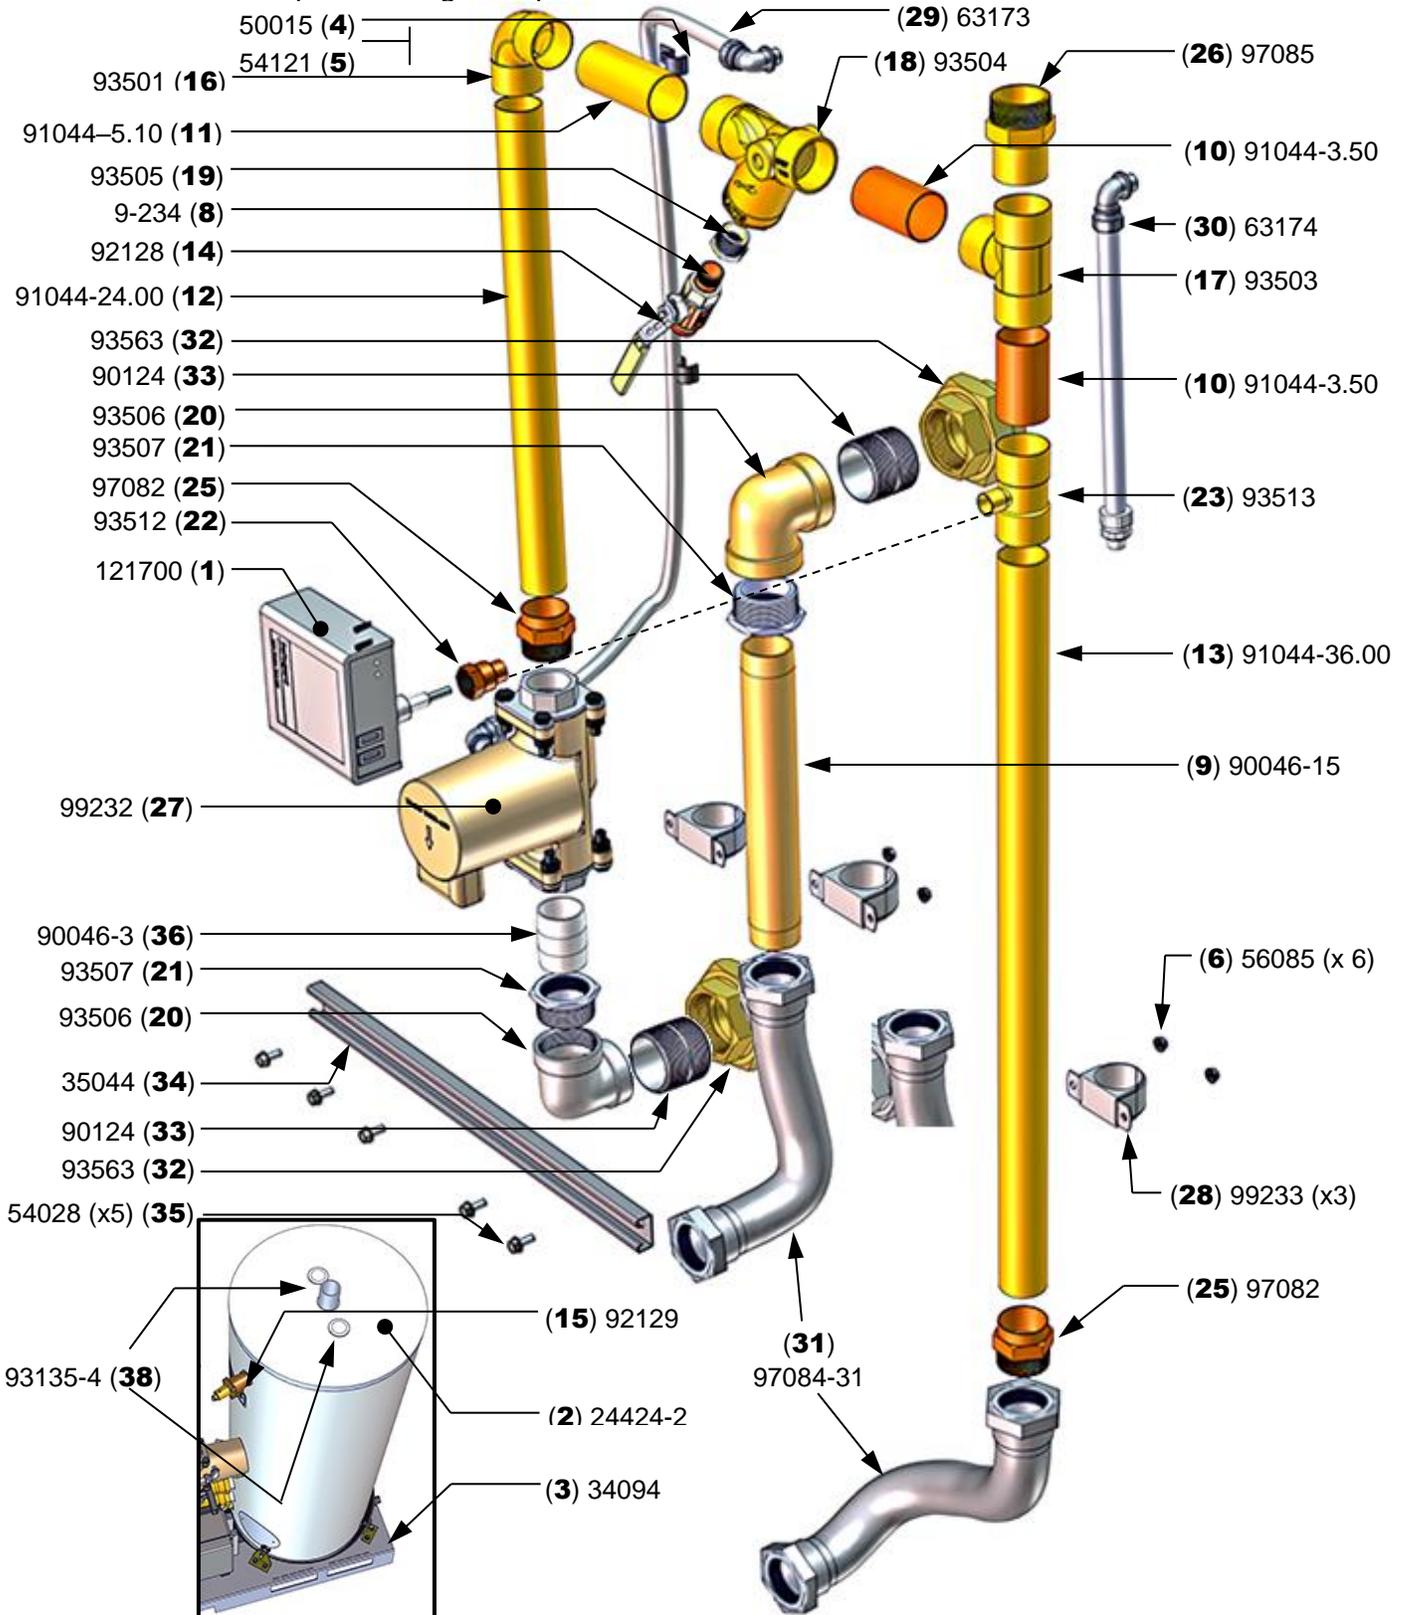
AMR Piping and Parts Identification (Partially Exploded)
